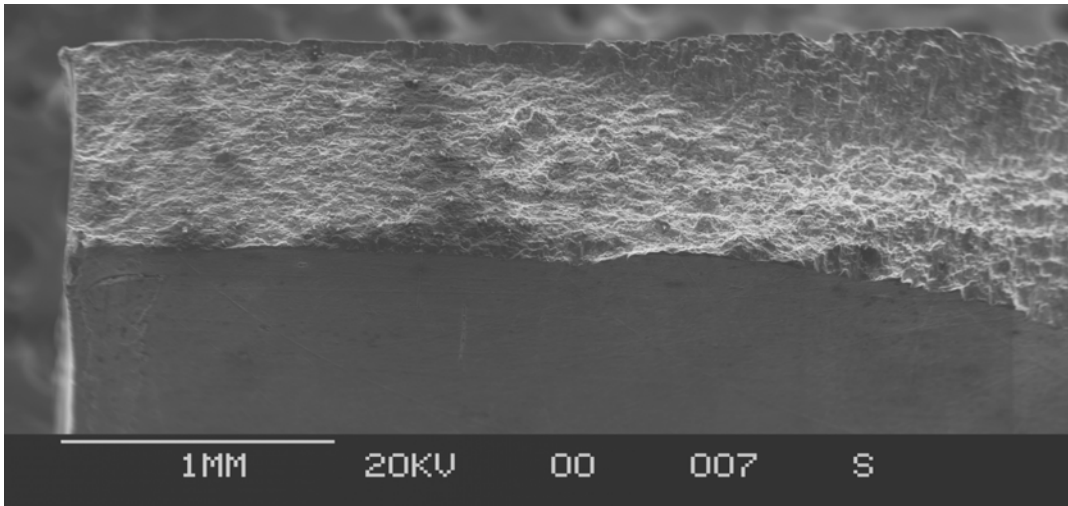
Fatigue Crack on Fracture Surface of Specimen 5773.
